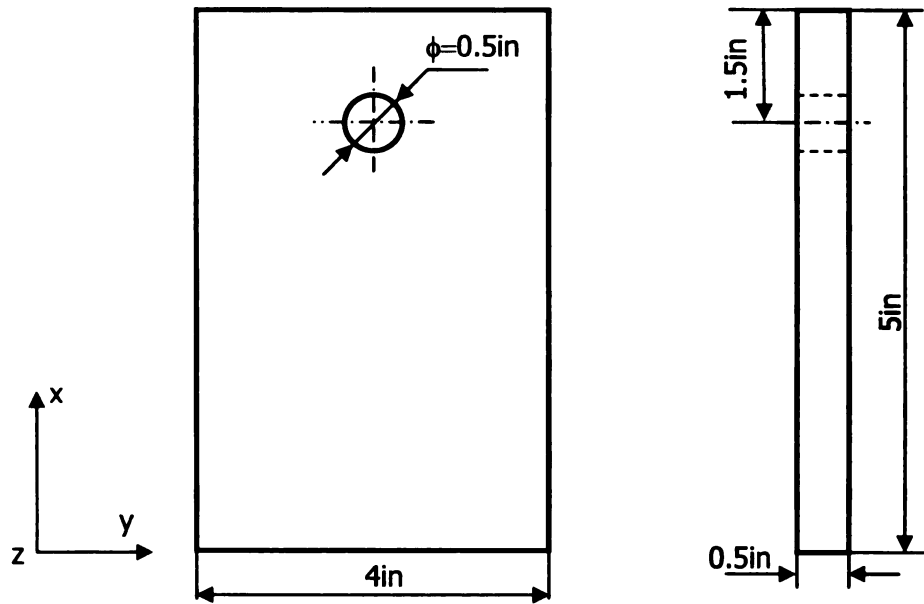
Specimen dimensions for the *Type 1* specimens.
